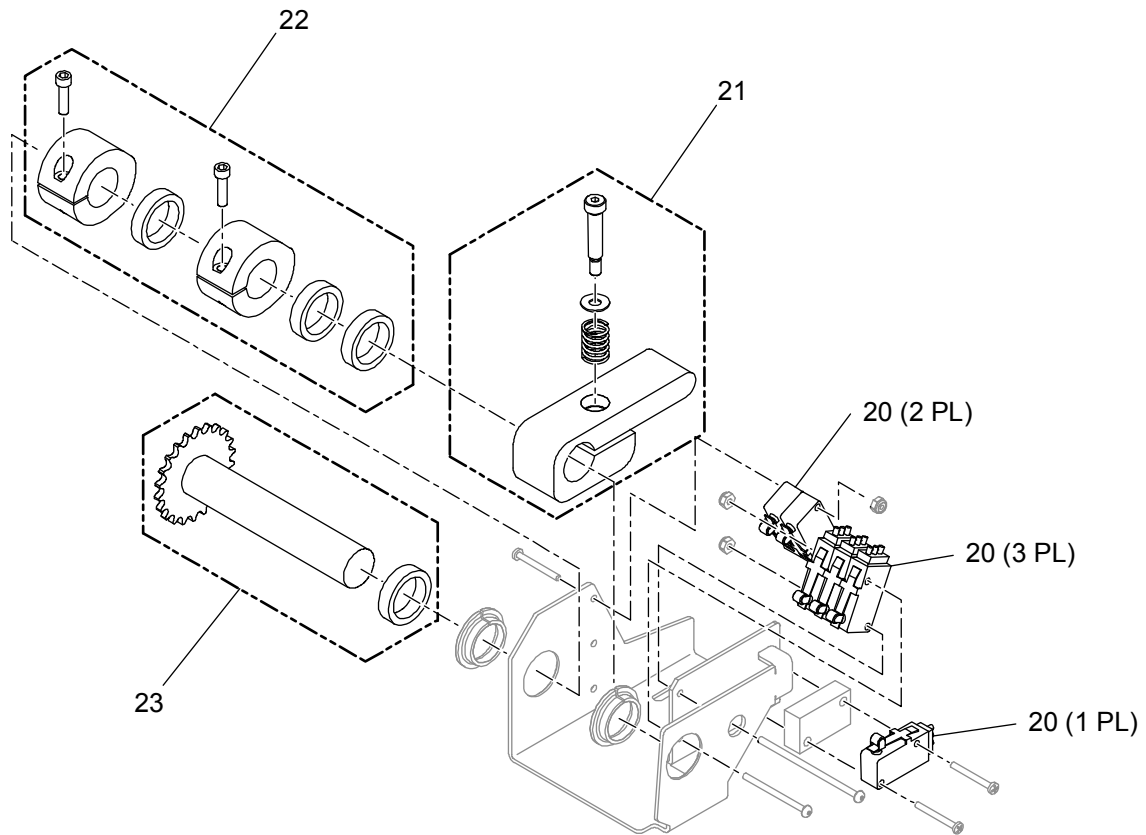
ELECTRIC BIFOLD BR2E RAMP ASSEMBLY (SHEET 5 OF 6)
